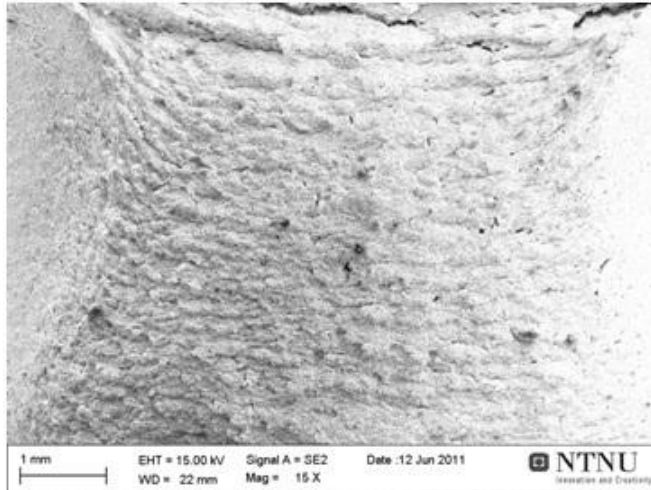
Fracture surface of charpy specimen 1 at 15x magnification.
